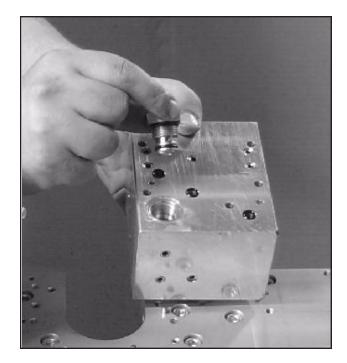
Replace the two o-rings and install Check Valve Assembly into the Super V Valve Block Assembly. Use a 15/16" socket to tighten the Check Valve Assembly.
